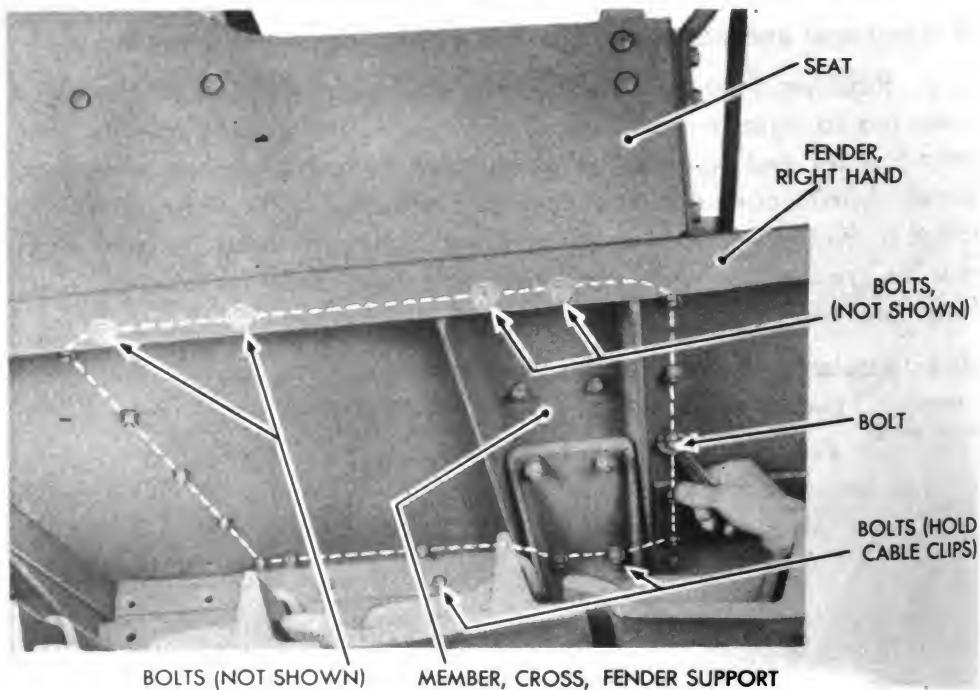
Removing Bolts Which Hold Seat to Right Fender
